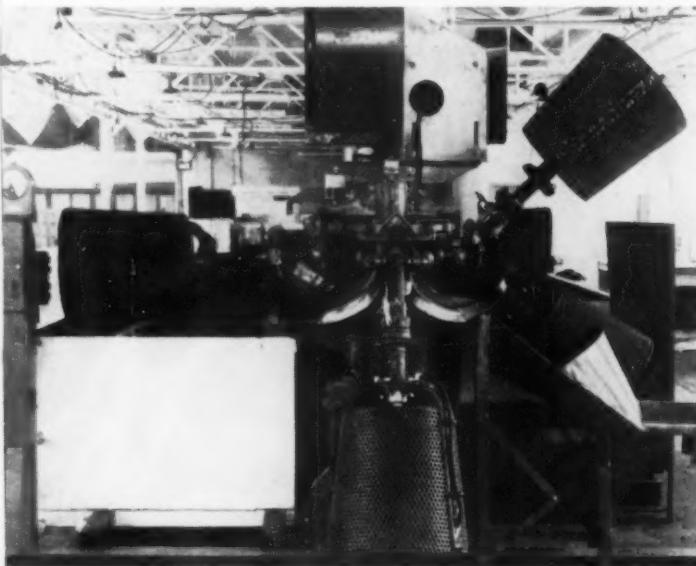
Small-parts full-automatic plating machine uses perforated baskets mounted on special spindle assemblies for carrying workpieces. Cams raise and lower the baskets. Baskets in foreground are shown in four positions: raised, loading, lowered and unloading. Courtesy Frederic B. Stevens, Inc.
